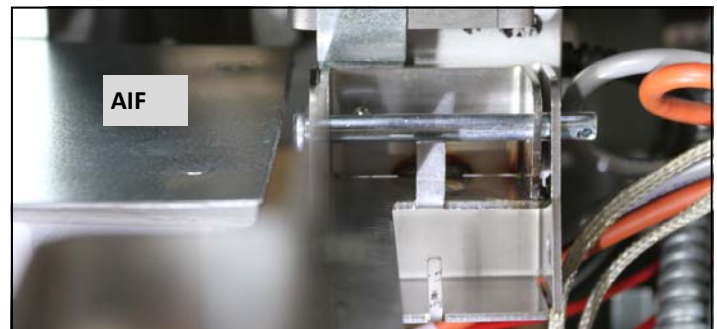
The AIF board (above left) must be lowered to allow placement of the bracket's pin.
